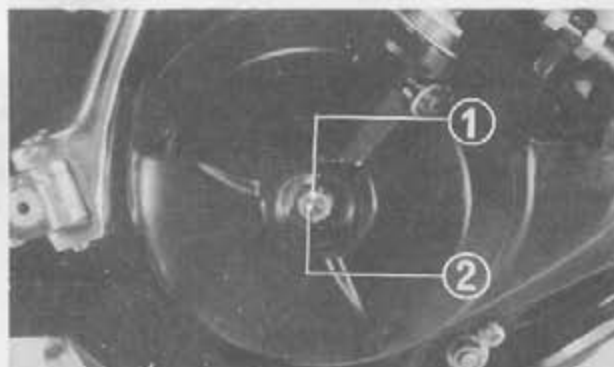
(1) Lock nut (2) Clutch adjuster
